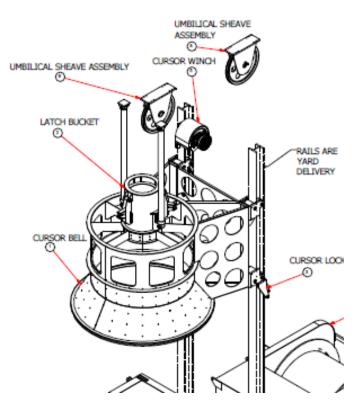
LARS Components of WROV moonpools with dimension 4,8 x 4,8 meters.
